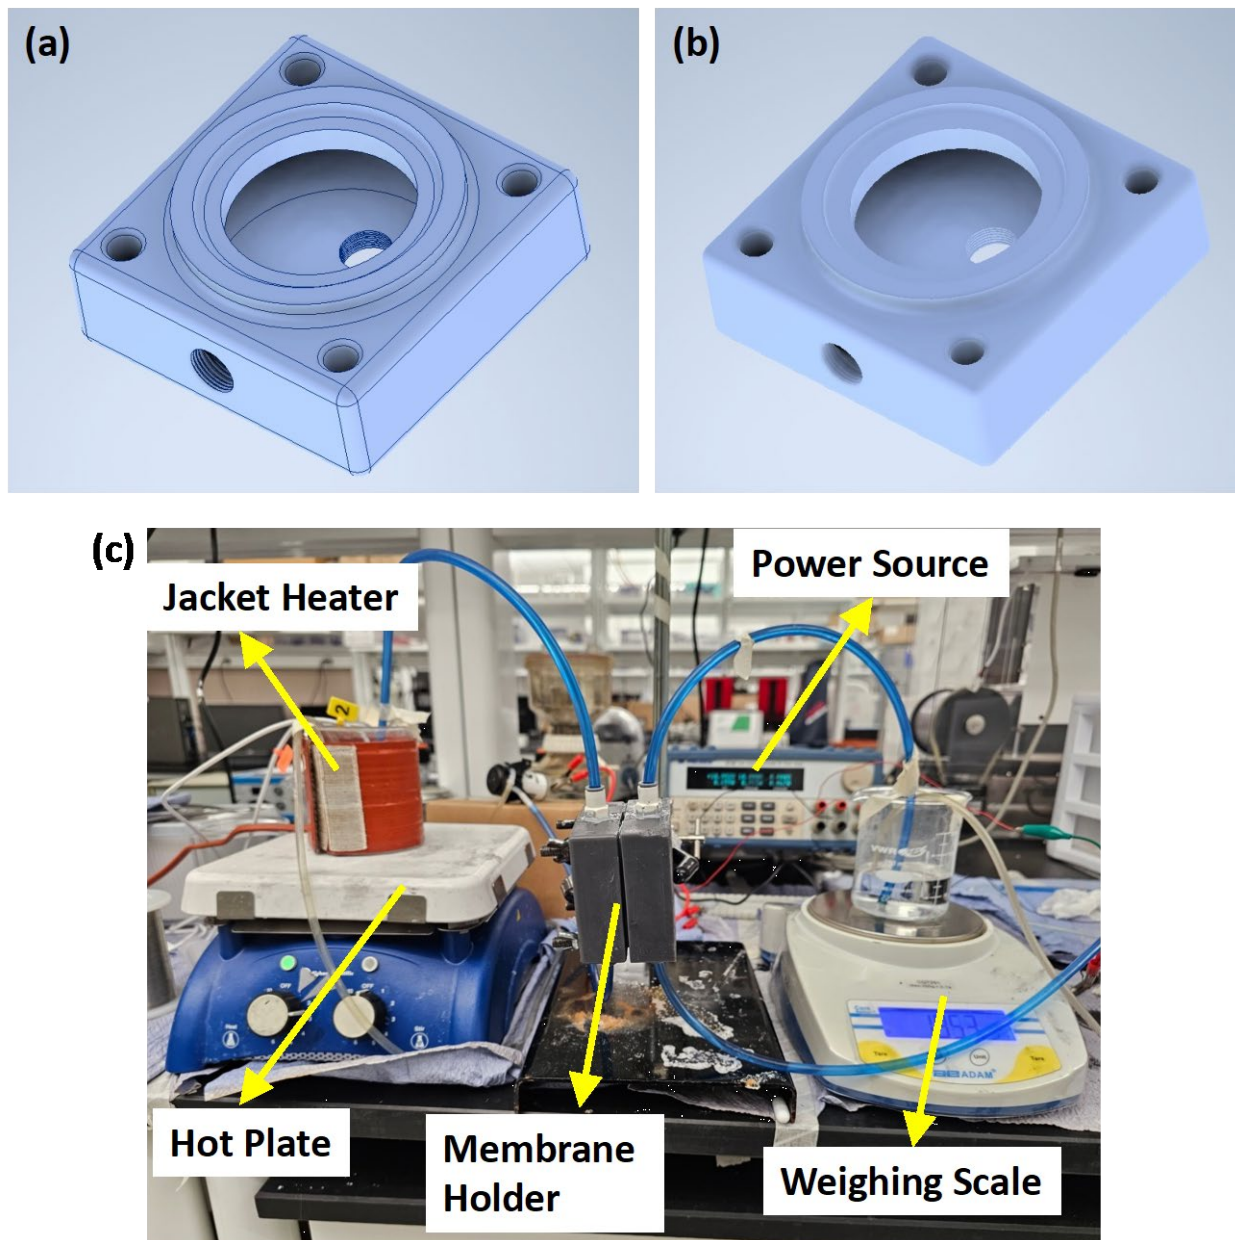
CAD drawing of the membrane holder (a) top part, (b) bottom part. (c) Setup for membrane distillation using DIW printed metal mesh membrane.
